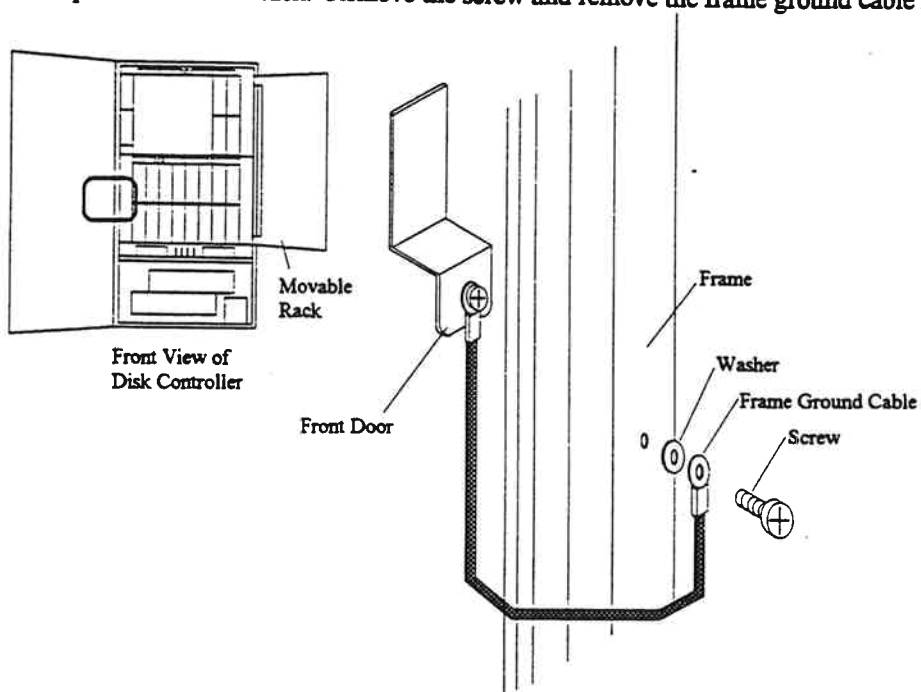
Removal of the Frame Ground Cable
